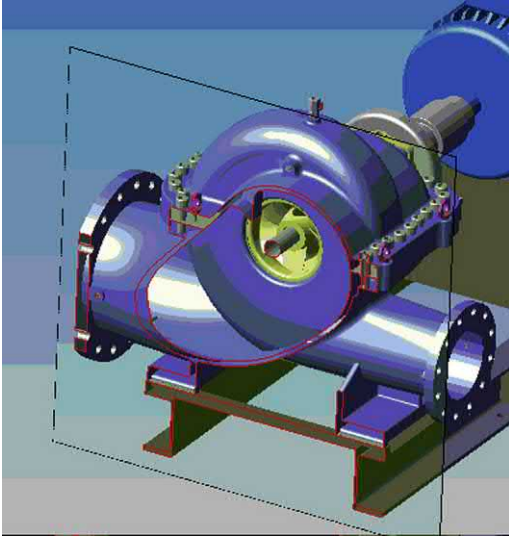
Side/radial entry arrangements can combine with certain outlet duct designs to give a connection arrangement that is often attractive to pipe layout designers.
